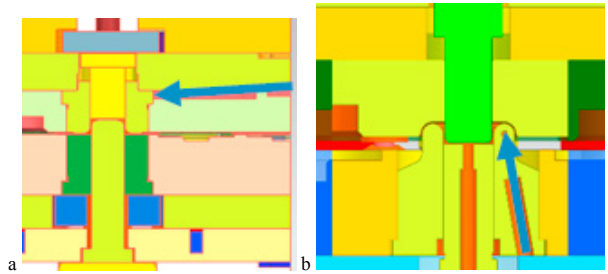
Thermocouples, indicated by the blue arrows, in the tool to measure (local) tool temperatures during start-up: a) at the outside of the die bush in the die 3 (deep drawing step); b) near the fillet radius of the die in die 4 (redrawing step)
